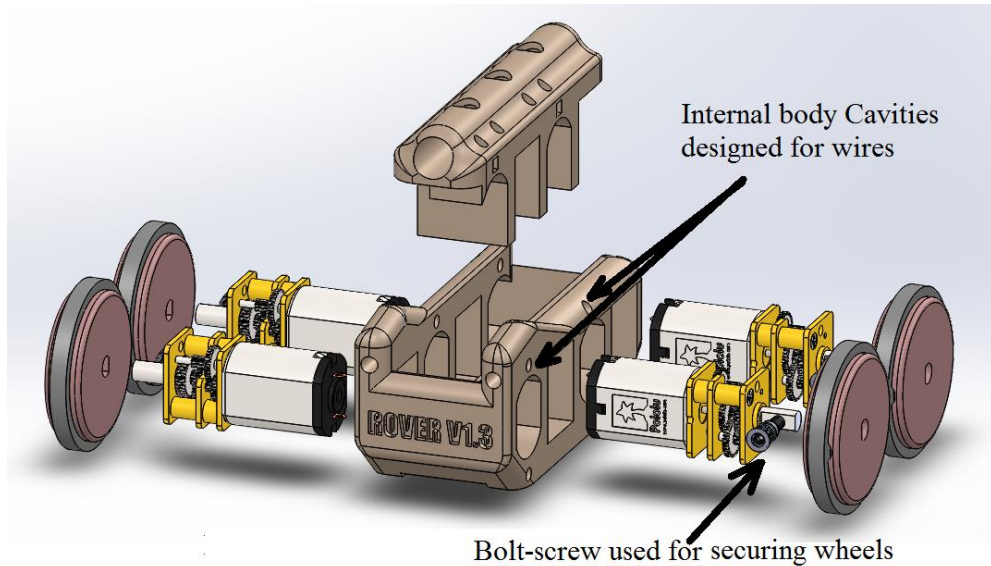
Exploded view of the current design of the inspection tool.
